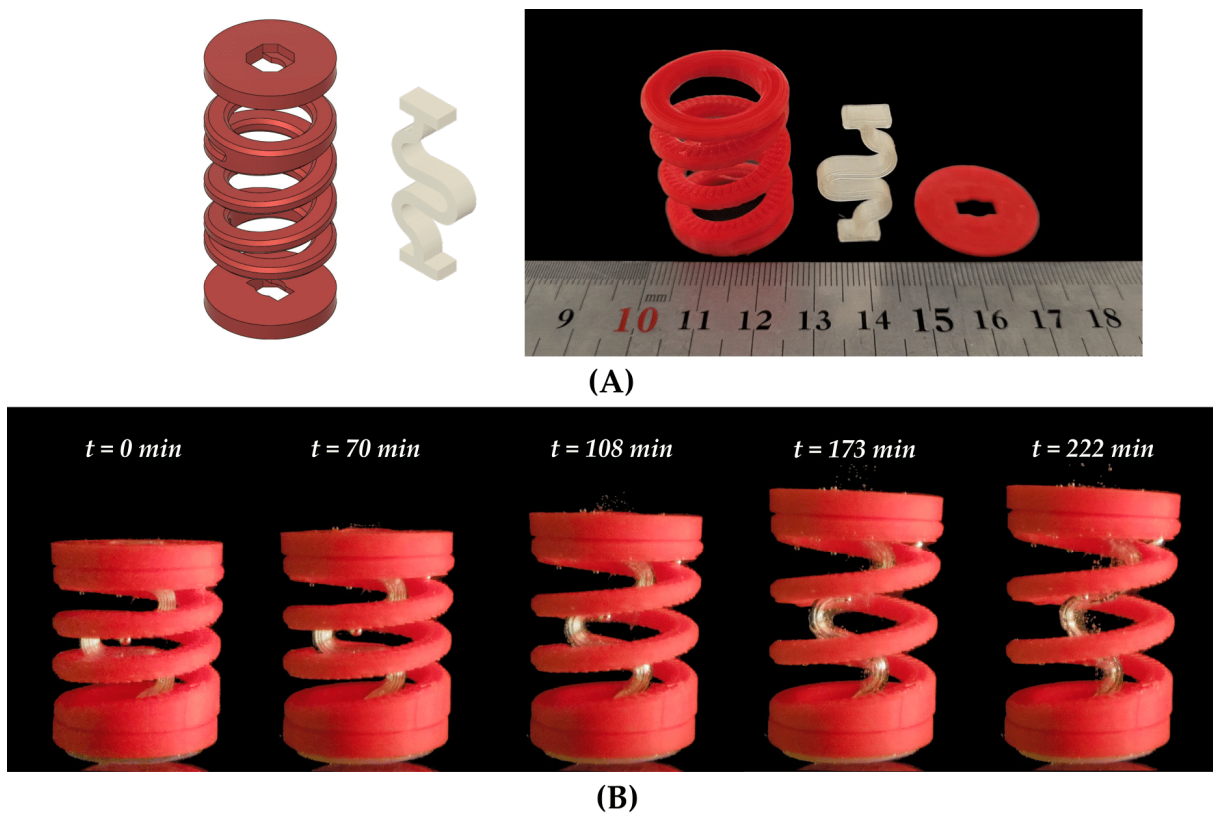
(A) CAD models & prototypes and (B) shape-morphing test for actuator 43.
